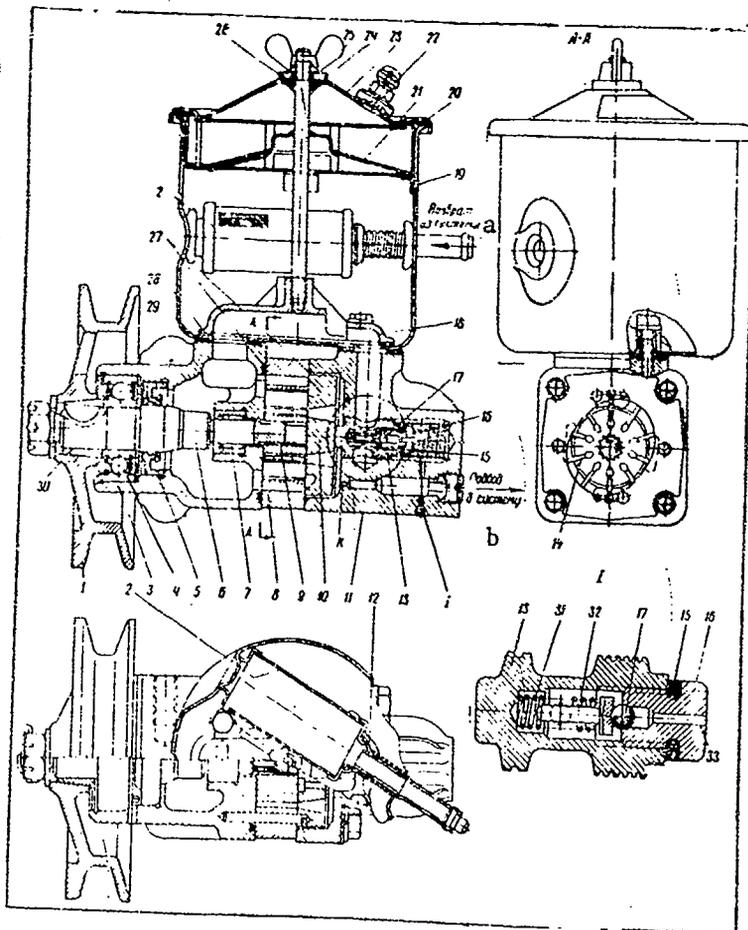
ZIL-130 and ZIL-131 power steering pump
